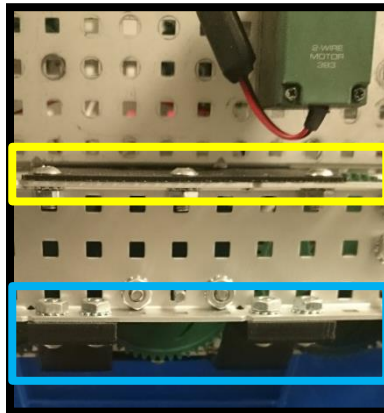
Completed assembly of "Chassis Rails Supports" on robot
